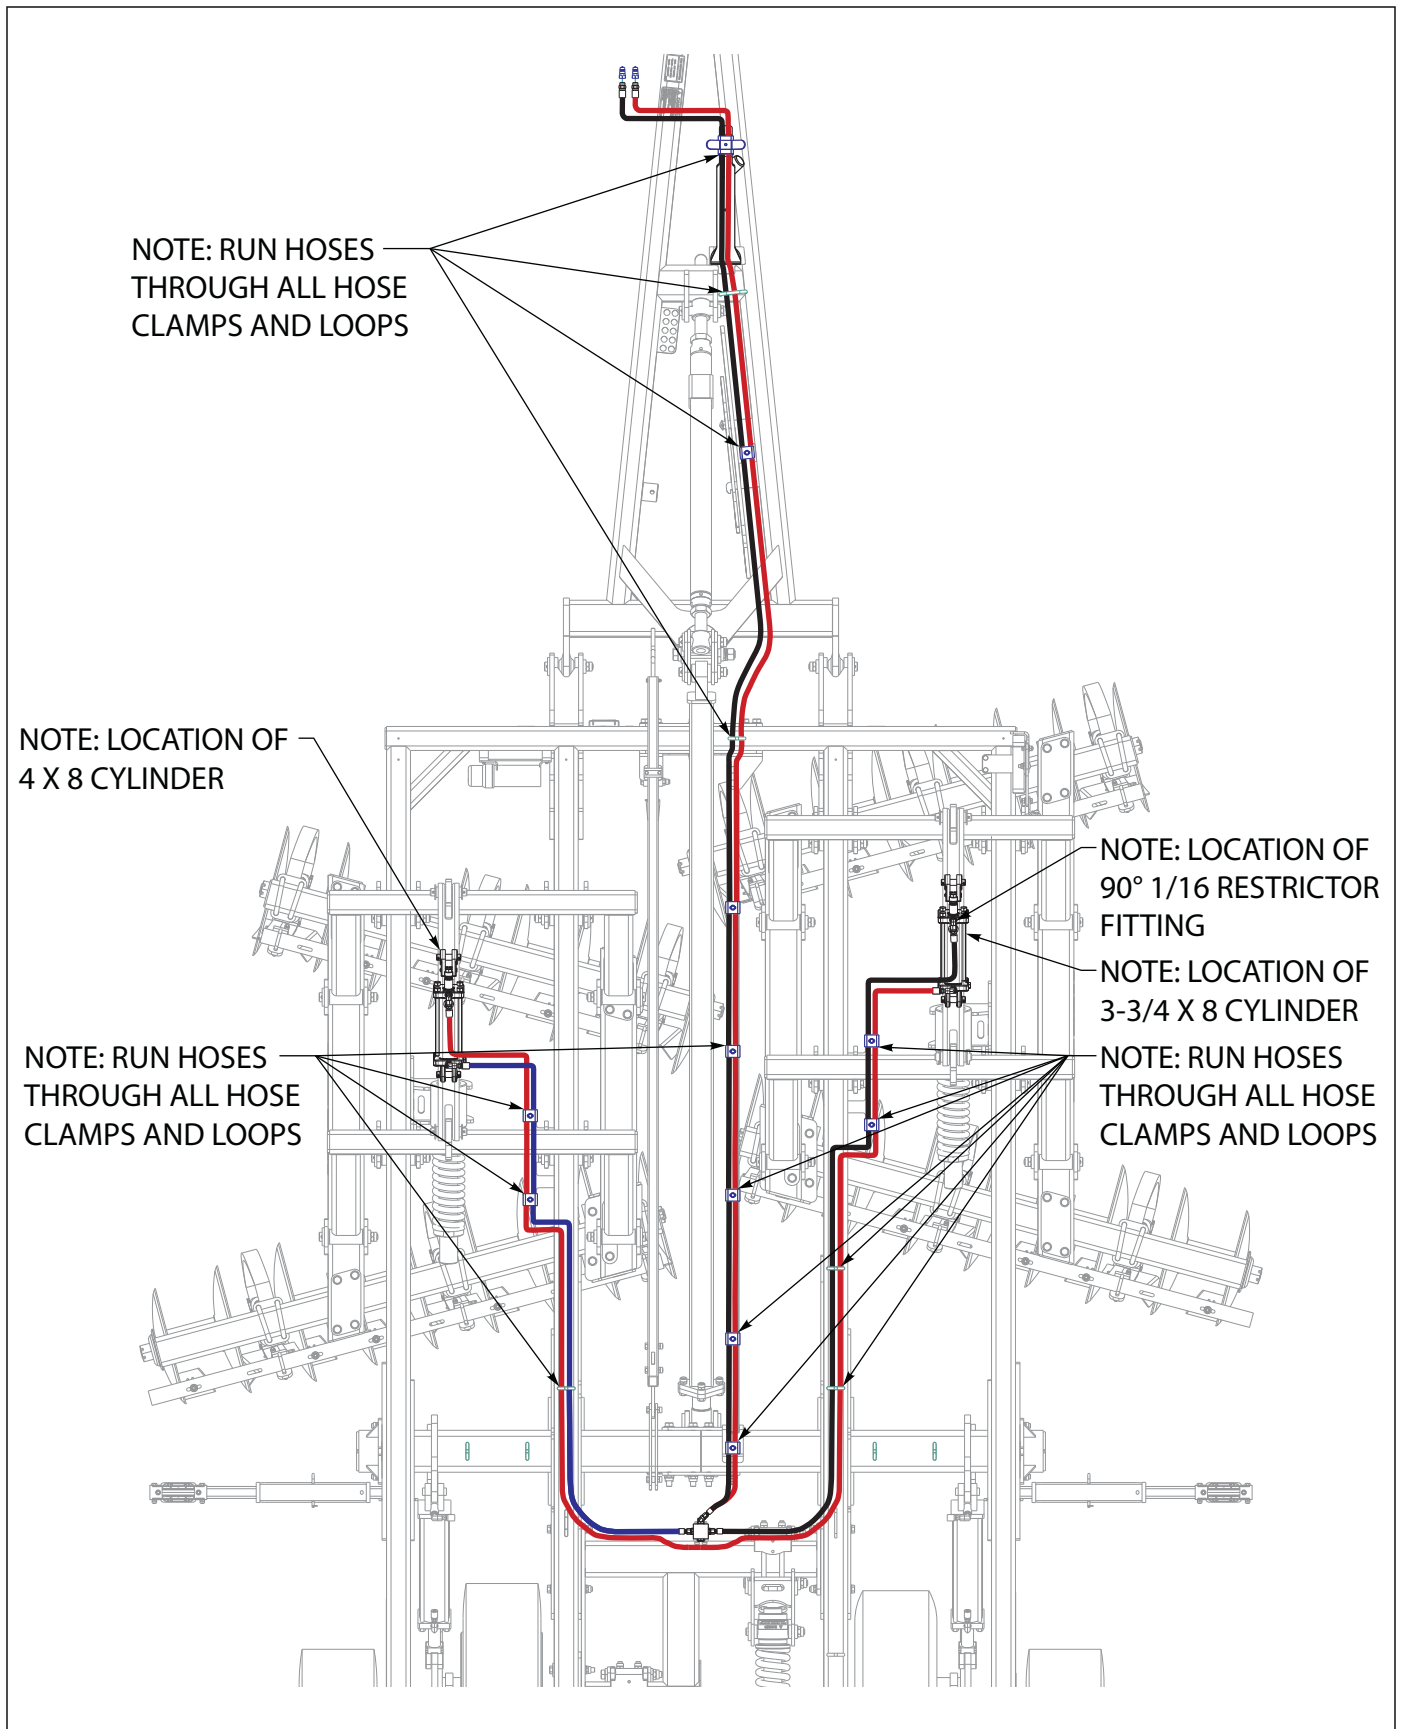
Hydraulic Gang Lift Layout 2411-06
